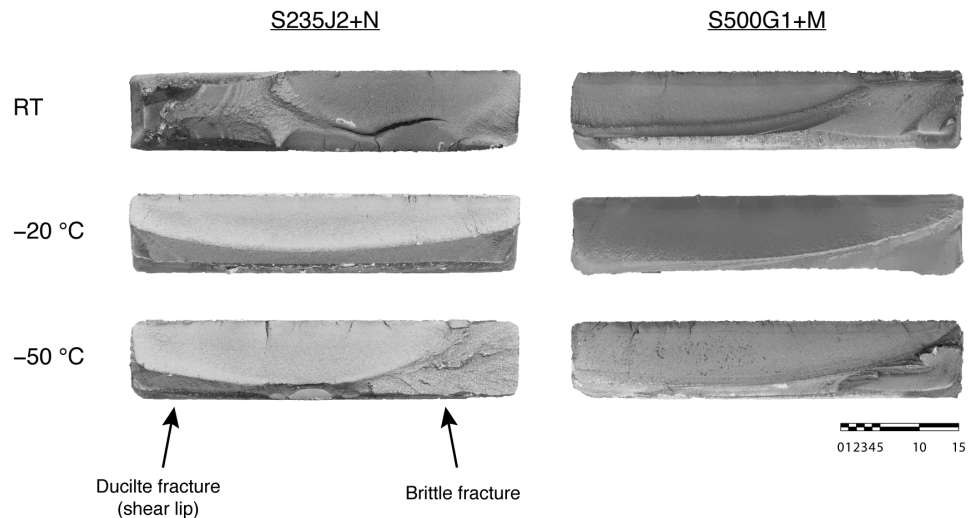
Fracture surfaces of transversal stiffener specimens (scale in millimetres)
